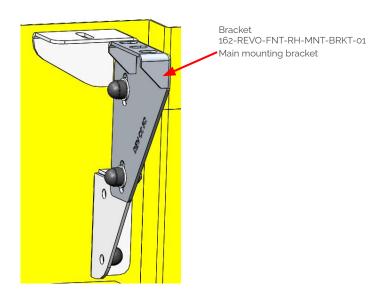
Reverse the main mounting brackets - Use the bracket labeled "Front Left" on the right side of the vehicle, and the bracket labeled "Front Right" on the left side of the vehicle"
